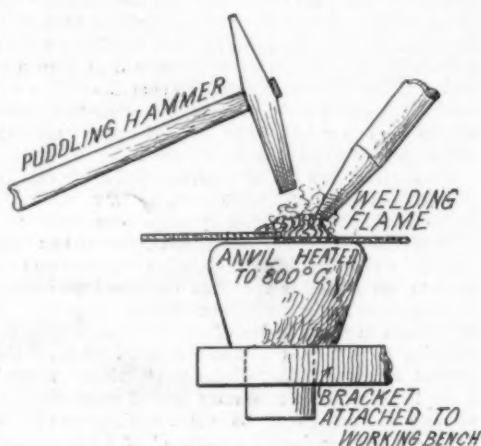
Welding sheet nickel under the hammer.
